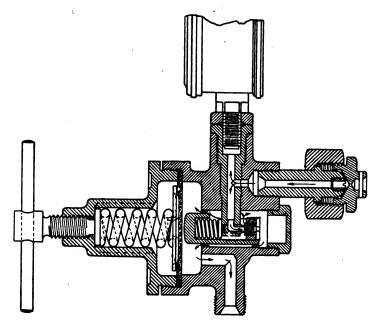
Section of Pressure Regulator Courtesy of Oxweld Acetylene Company, Chicago, Illinois
